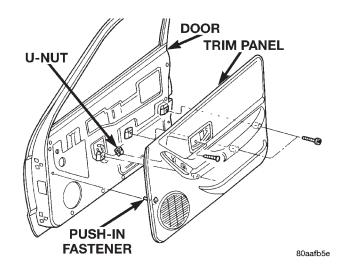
Front Door Trim Panel Remove/Install - Power Window
